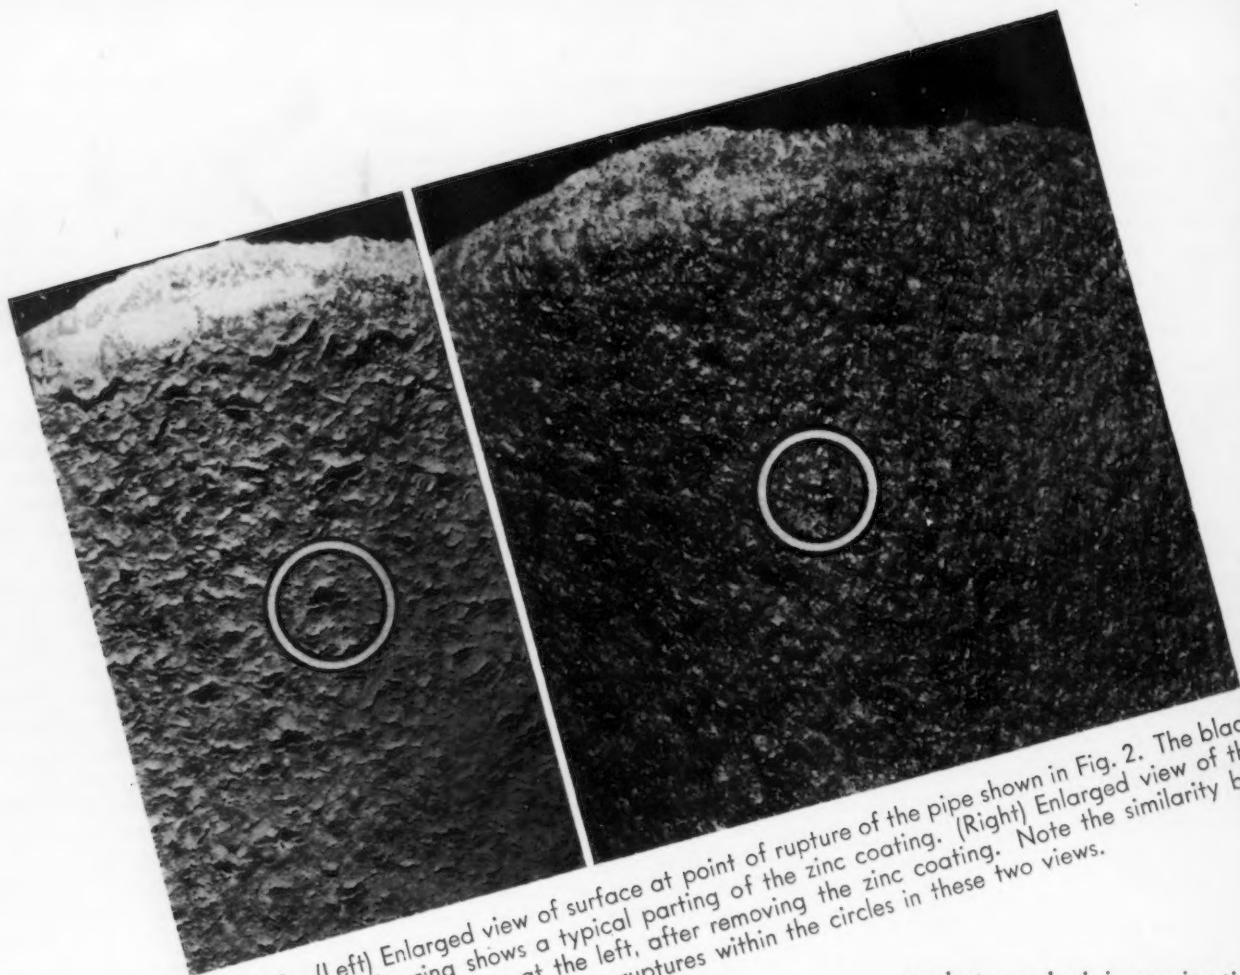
(Left) Enlarged view of surface at point of rupture of the pipe shown in Fig. 2. The black spot within the ring shows a typical parting of the zinc coating. (Right) Enlarged view of the surface of the pipe shown at the left, after removing the zinc coating. Note the similarity between the surface ruptures within the circles in these two views.
